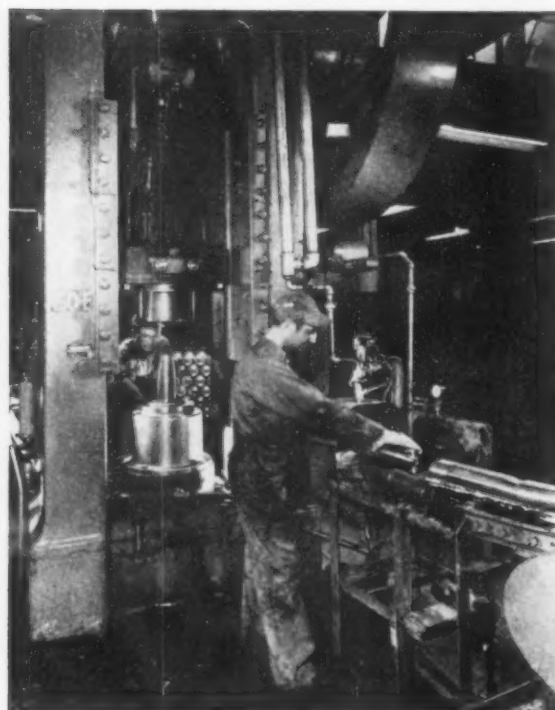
One of seven cold-nosing presses which form the nose of the shell. Rough-turned shells are sprayed with drawing compound, right, before being set upright in press.
